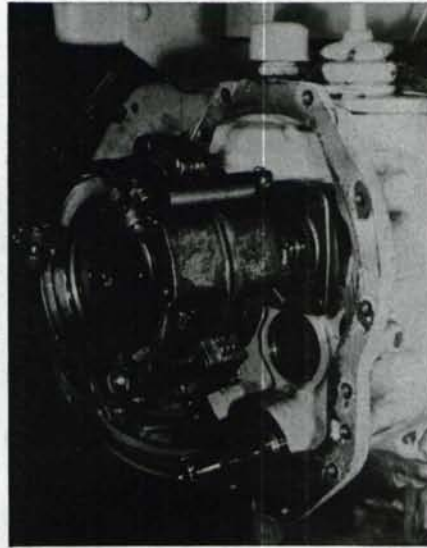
View showing "Power-Director" clutch unit on transmission input shaft.
